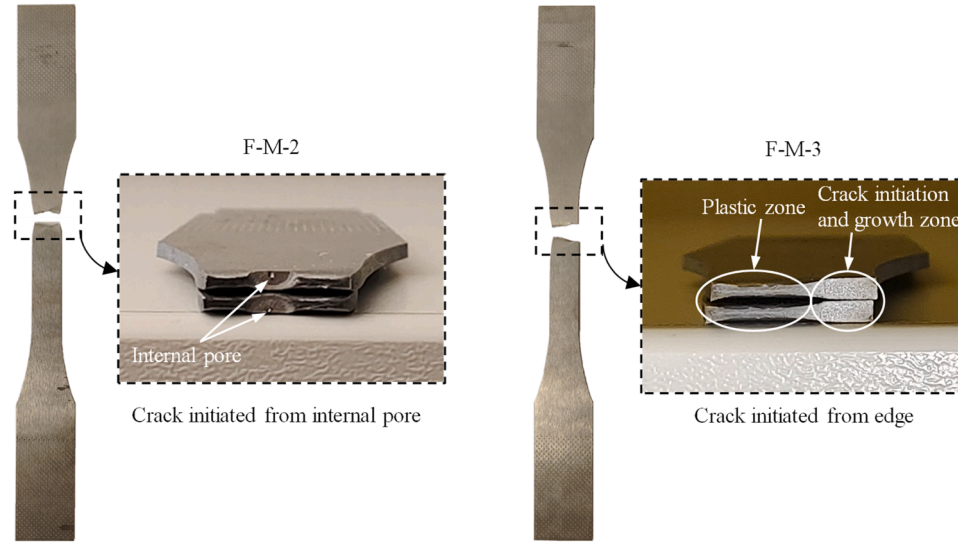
Typical fractured machined coupons and fracture surfaces.
